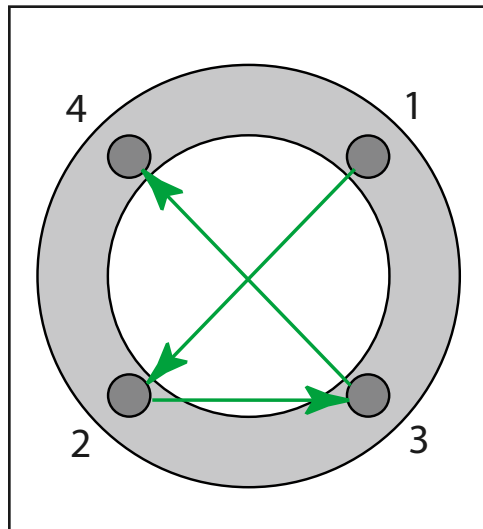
Tightening pattern of 1/2-inch nuts for thermal fluid inlet and outlet pipe flanges
